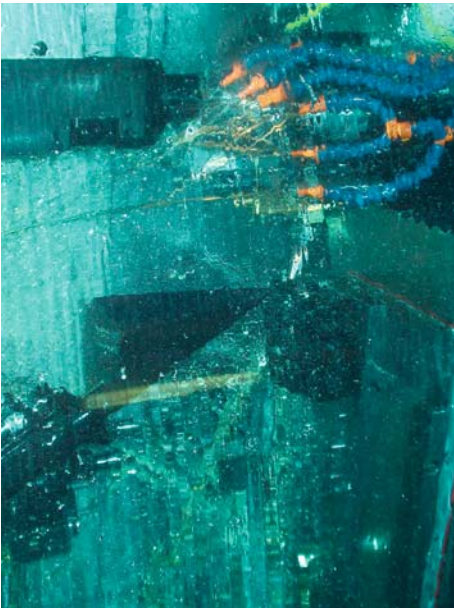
It is impossible to watch the milling steps due to the extensive cooling requirements
